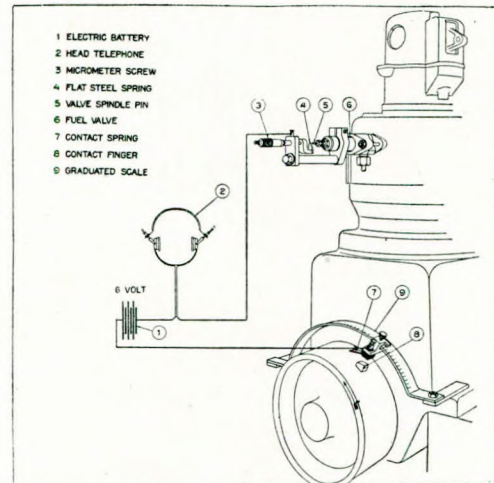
Sketch showing apparatus for adjusting fuel pumps.
